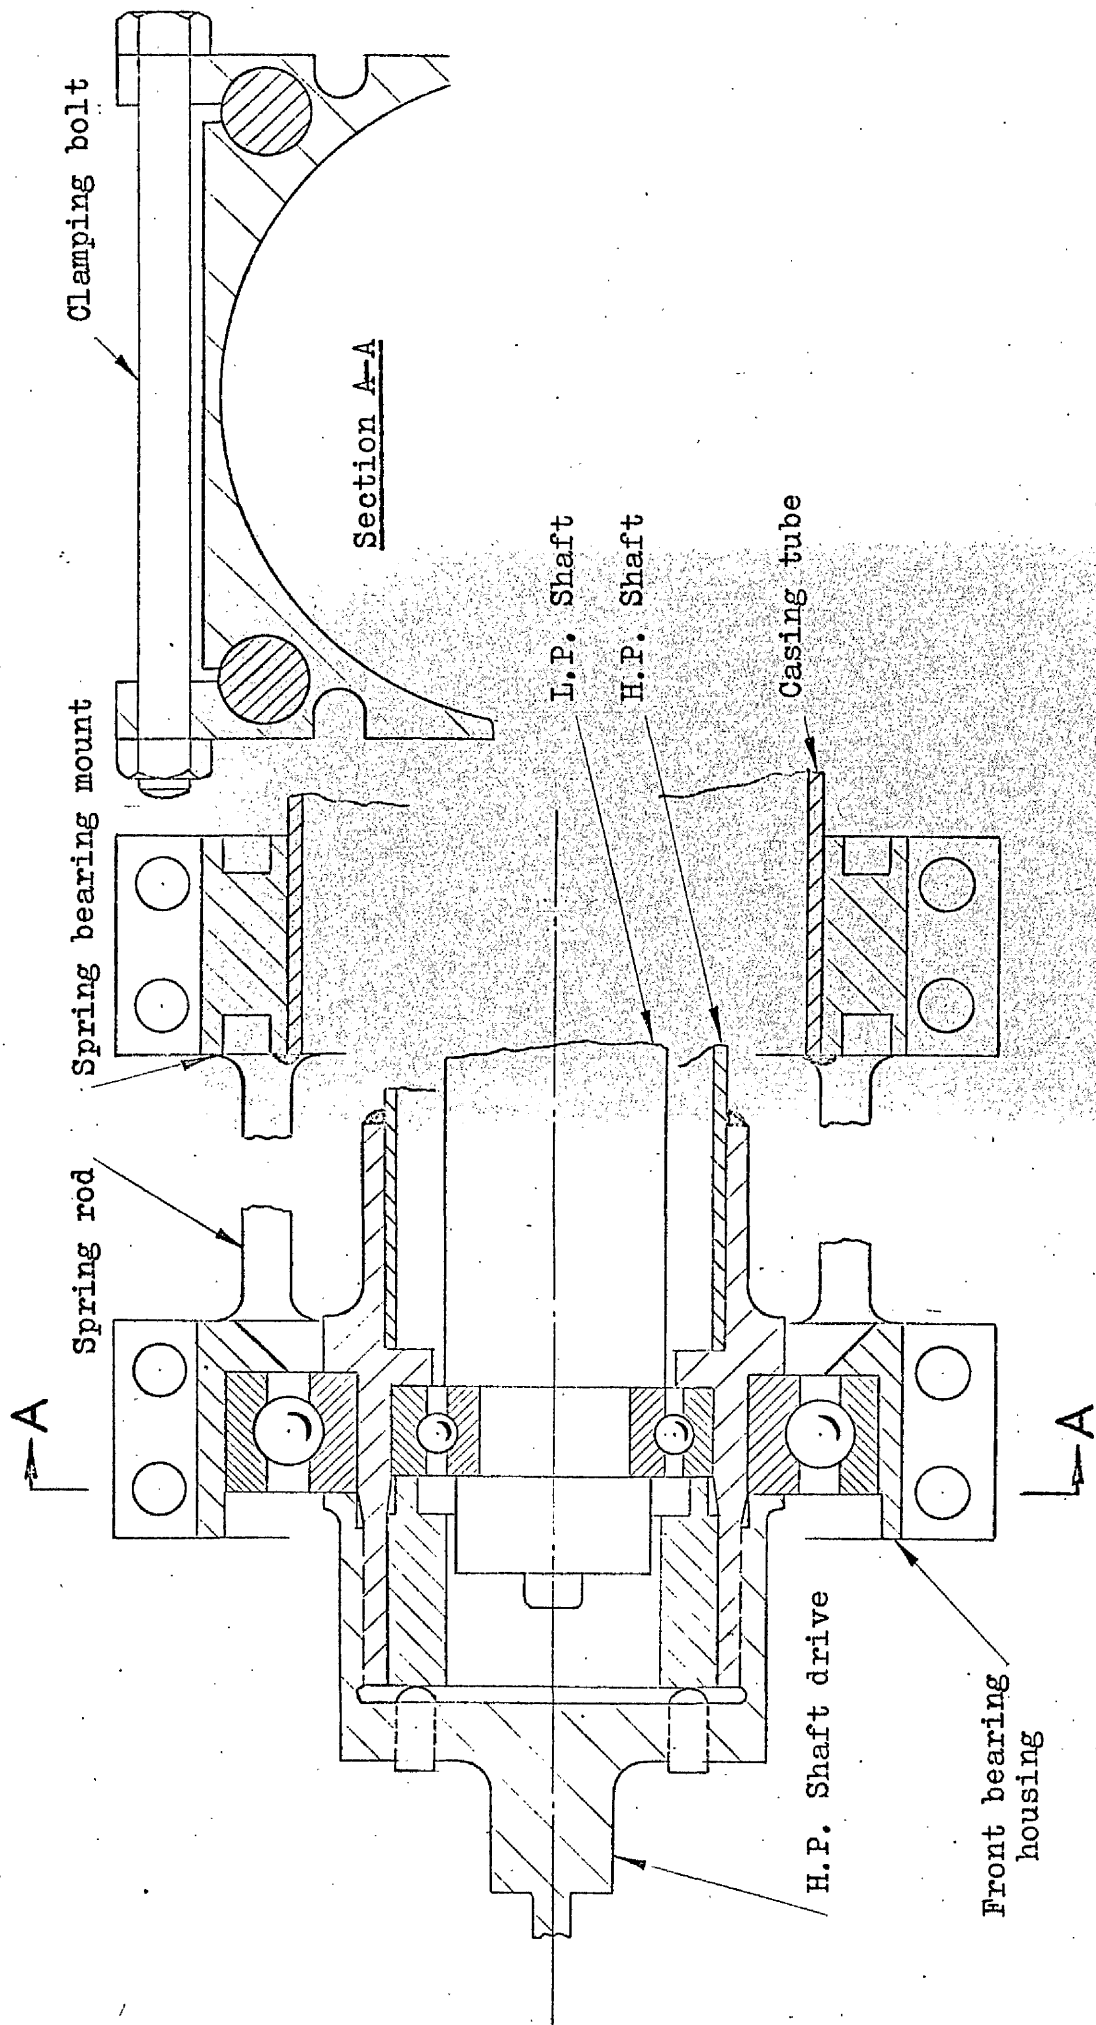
Arrangement of front bearing assembly and spring mounting
